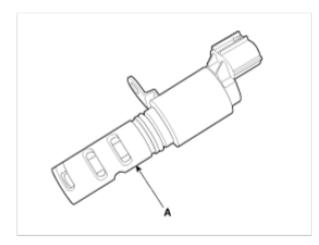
Identifying Oil Control Valve Sleeve Courtesy of HYUNDAI MOTOR AMERICA
